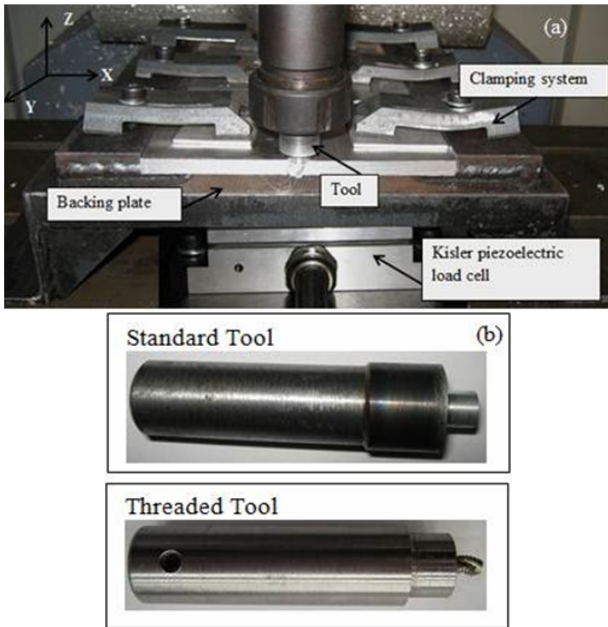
A schematic diagram of the experimental setup: (a) experimental setup; (b) standard and threaded tools.
